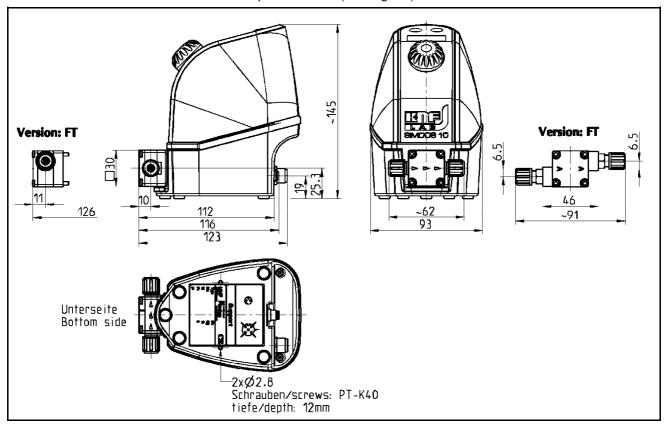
Mounting measurements (measurement tolerances as per DIN ISO 2768-1, tolerance class V)
